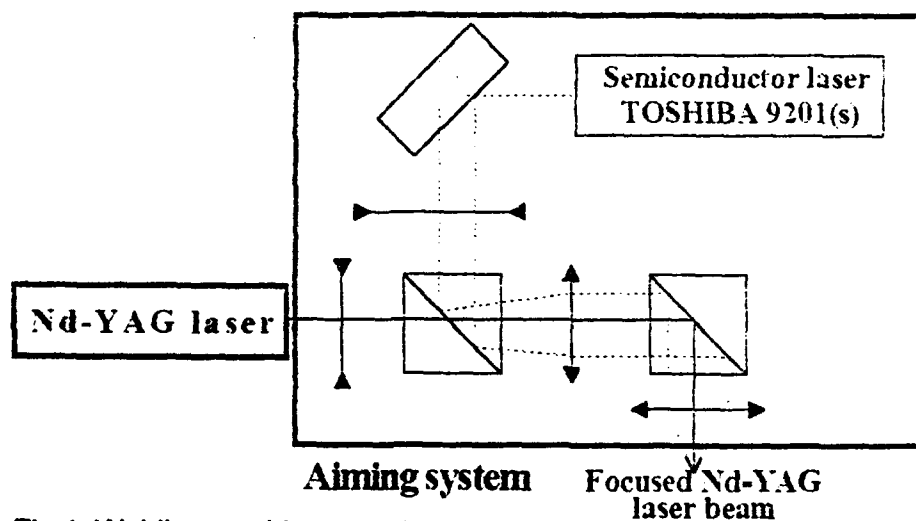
Welding machine based on Nd-YAG laser with an optomechanical aiming system.
